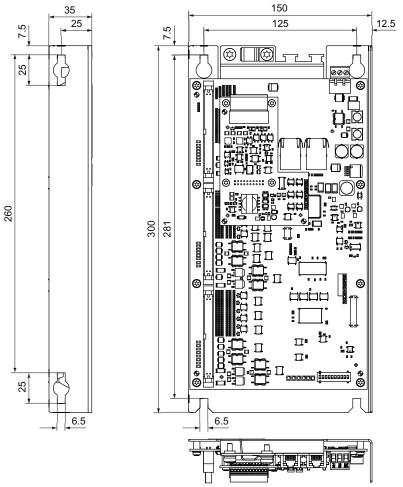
PP 72/48D 2/2A PN dimension drawing
